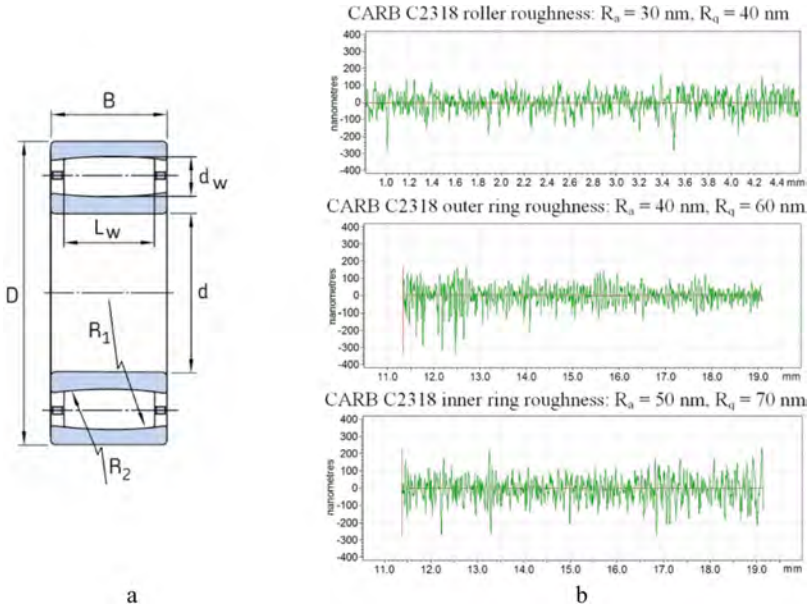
(a) Toroidal roller bearing geometry [30] and (b) Rugosity of bearing elements.
